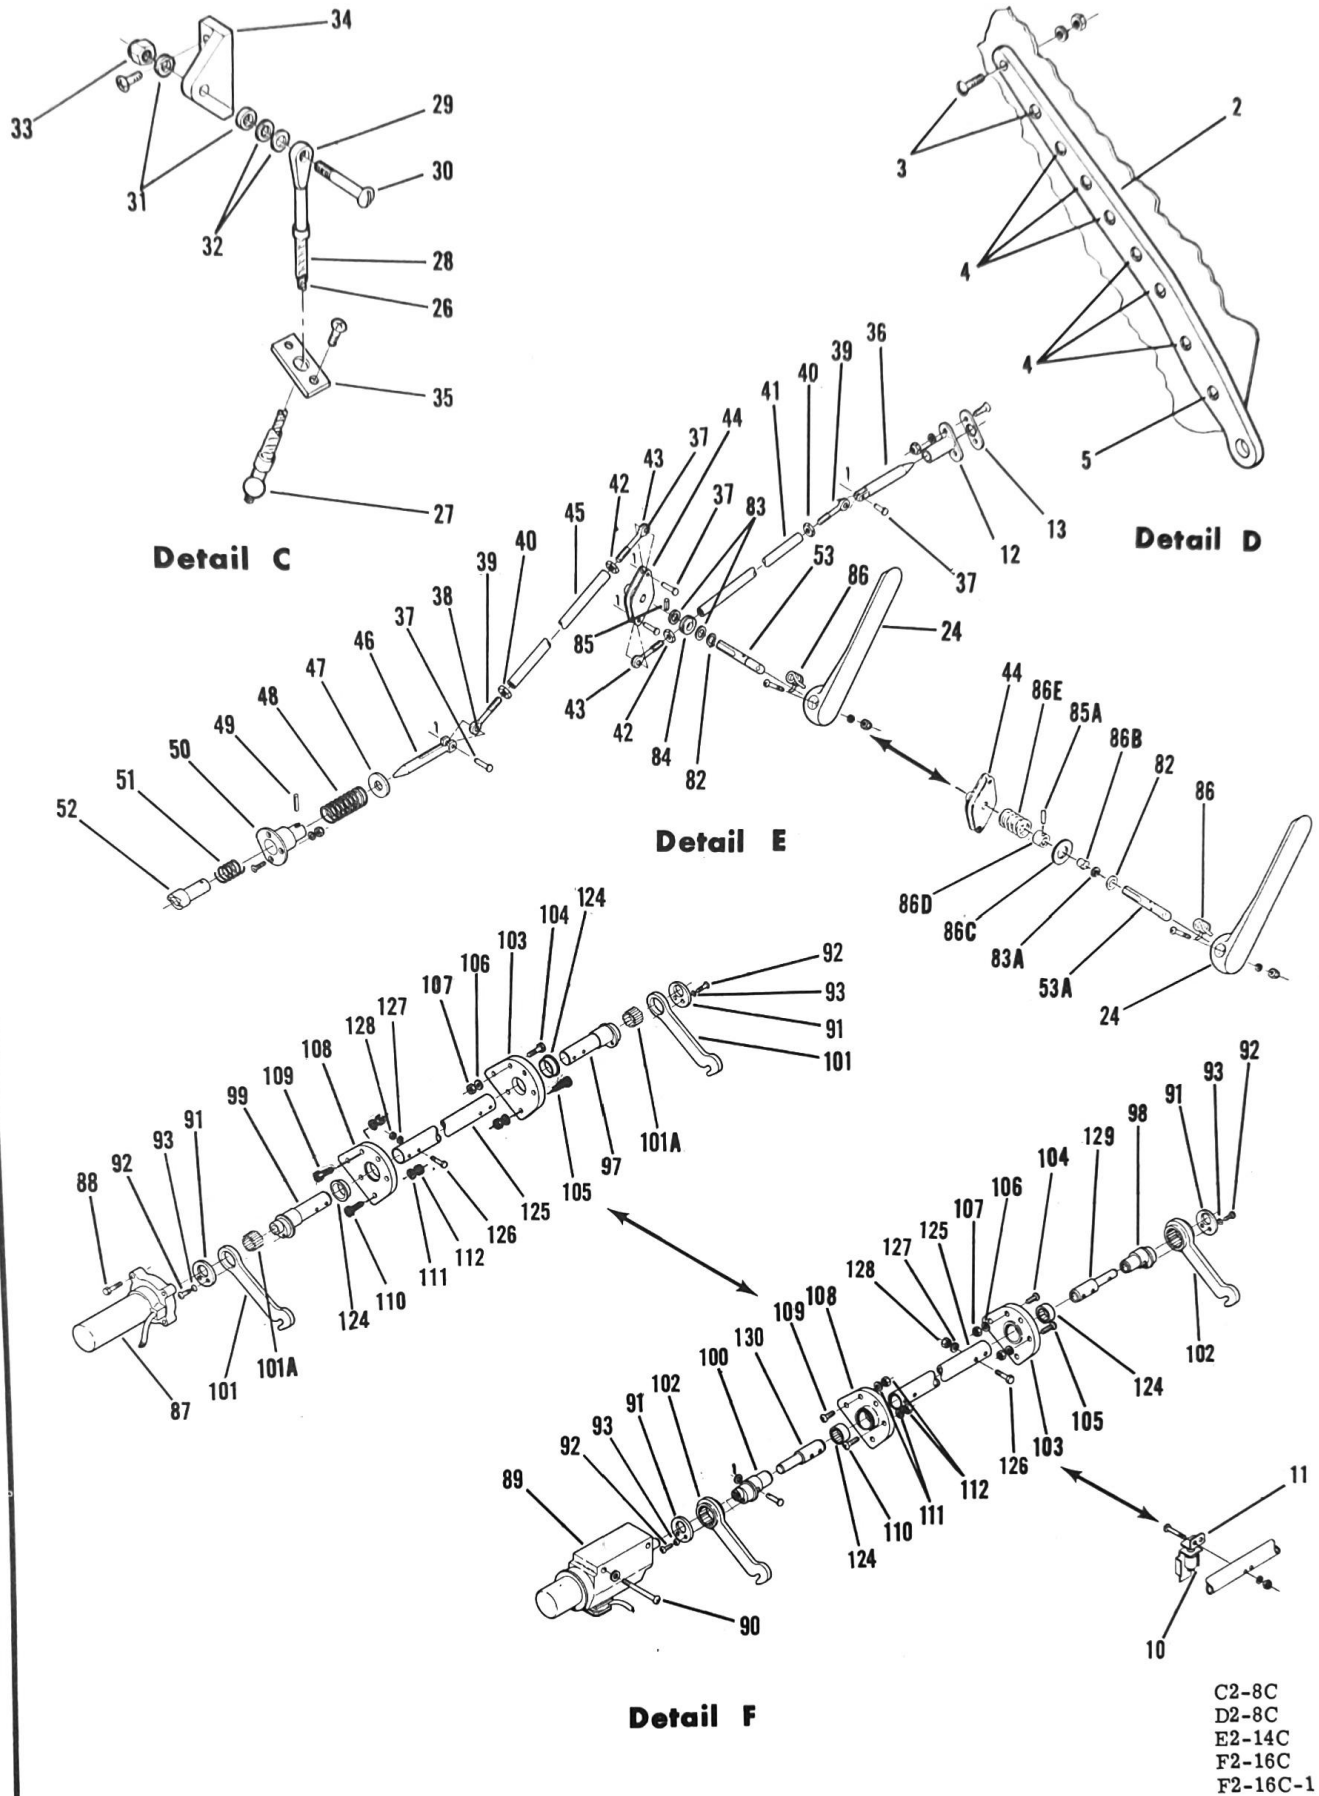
Cabin Door Assembly (Lower) (Sheet 2 of 2)
